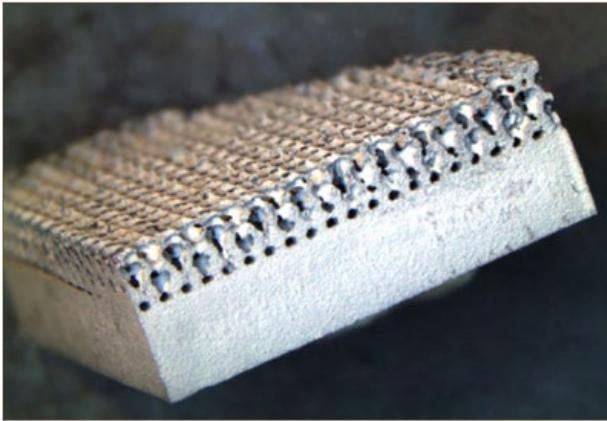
Three dimensional ingrowth surface manufactured using 3DT technology
